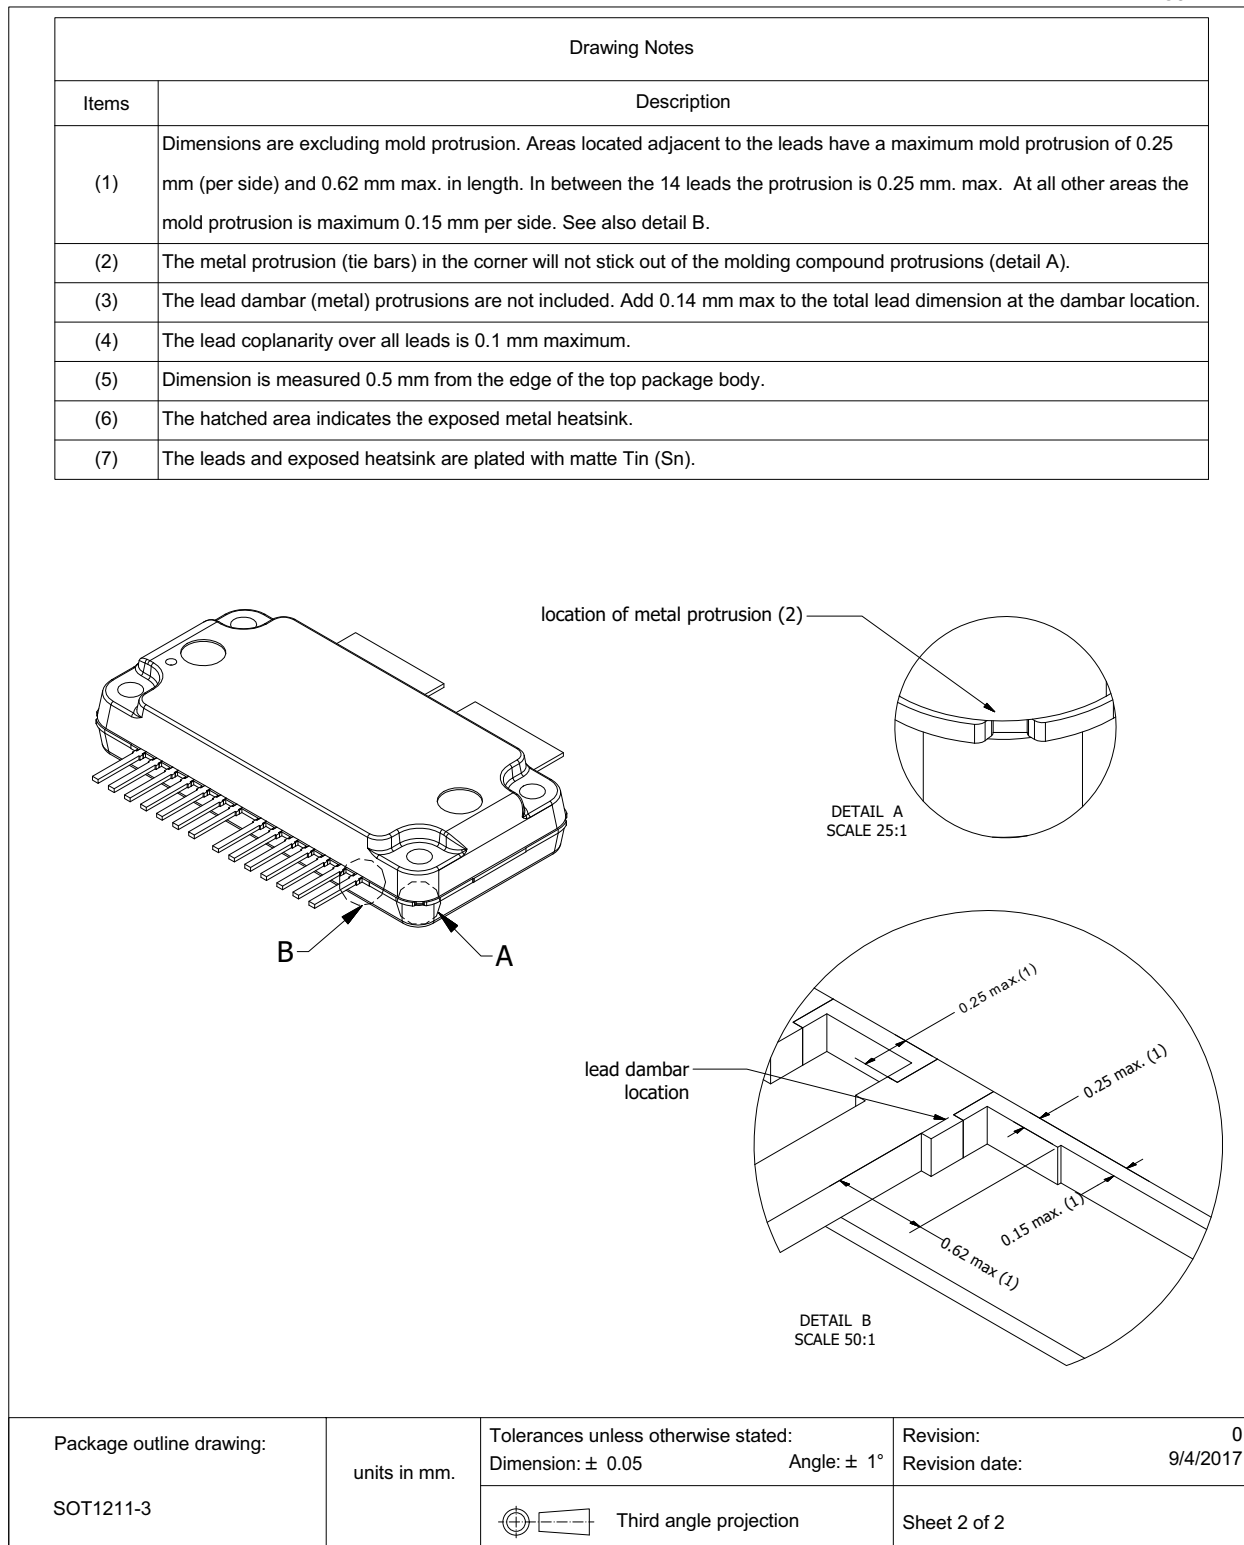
Package outline SOT1211-3 (sheet 2 of 2)
